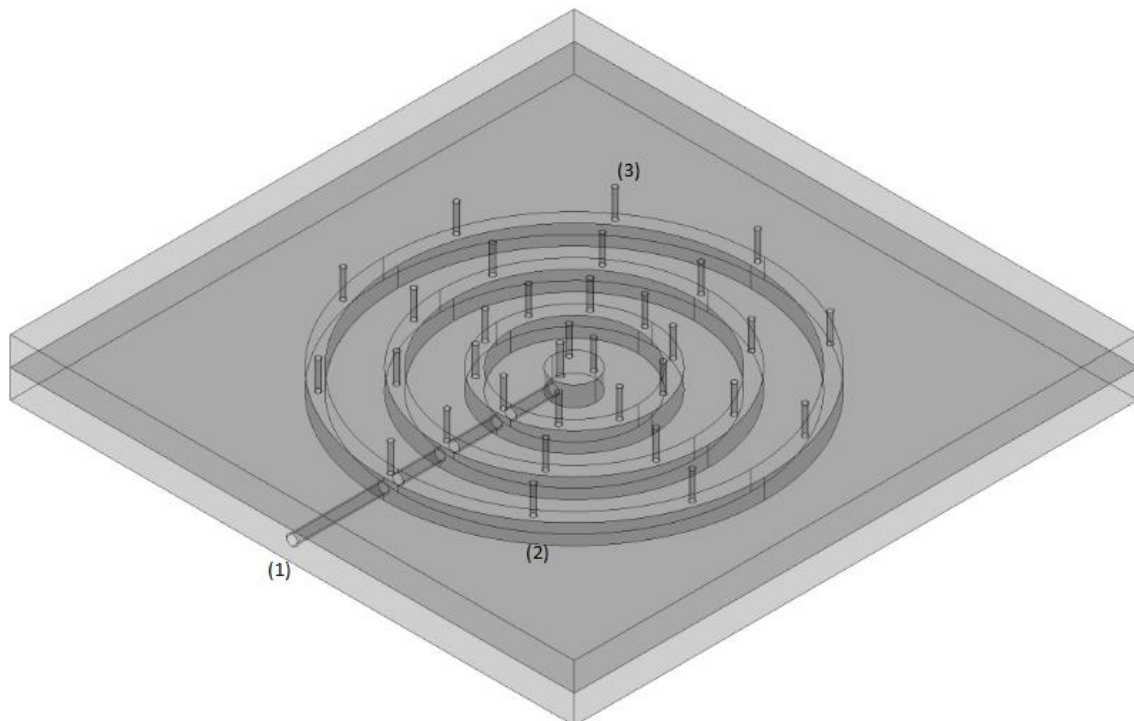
Bottom plate of the O-rings vacuum system. It is an aluminium plate, with a tube that connects to the outside (1). This tube, then connects to four different airways (2). This plate is joined to the top plate, where the sequence of orifices match the airways in this plate.
